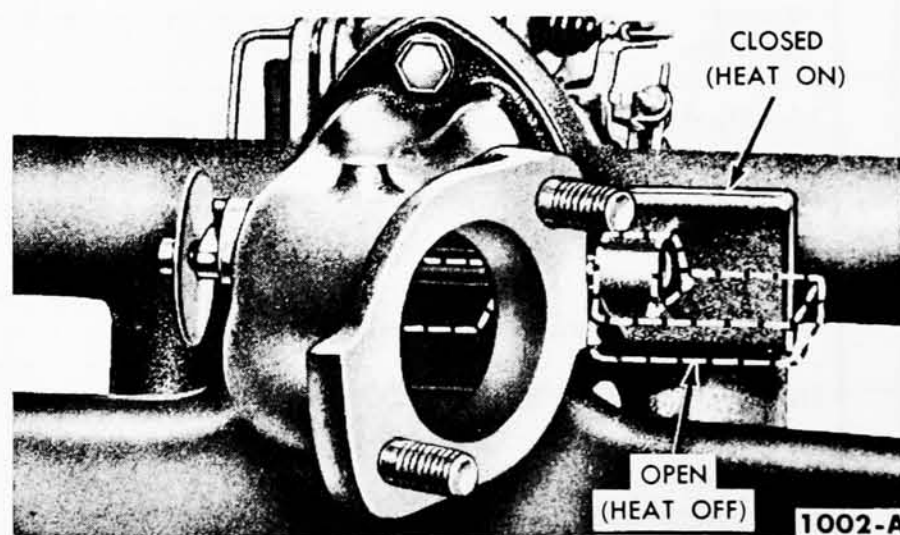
Exhaust Gas Control Valve—6-Cylinder Engine
